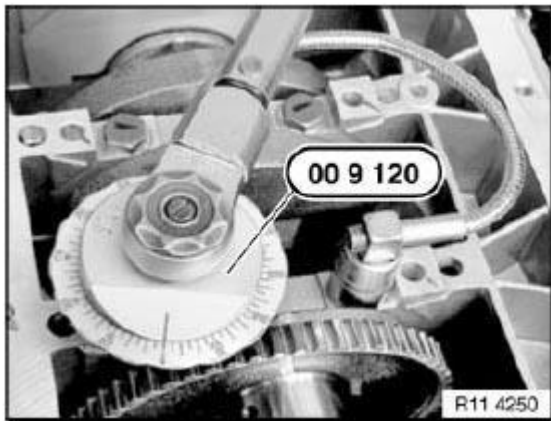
Tightening Main Bearing Bolts Using Special Tool (00 9 120)
